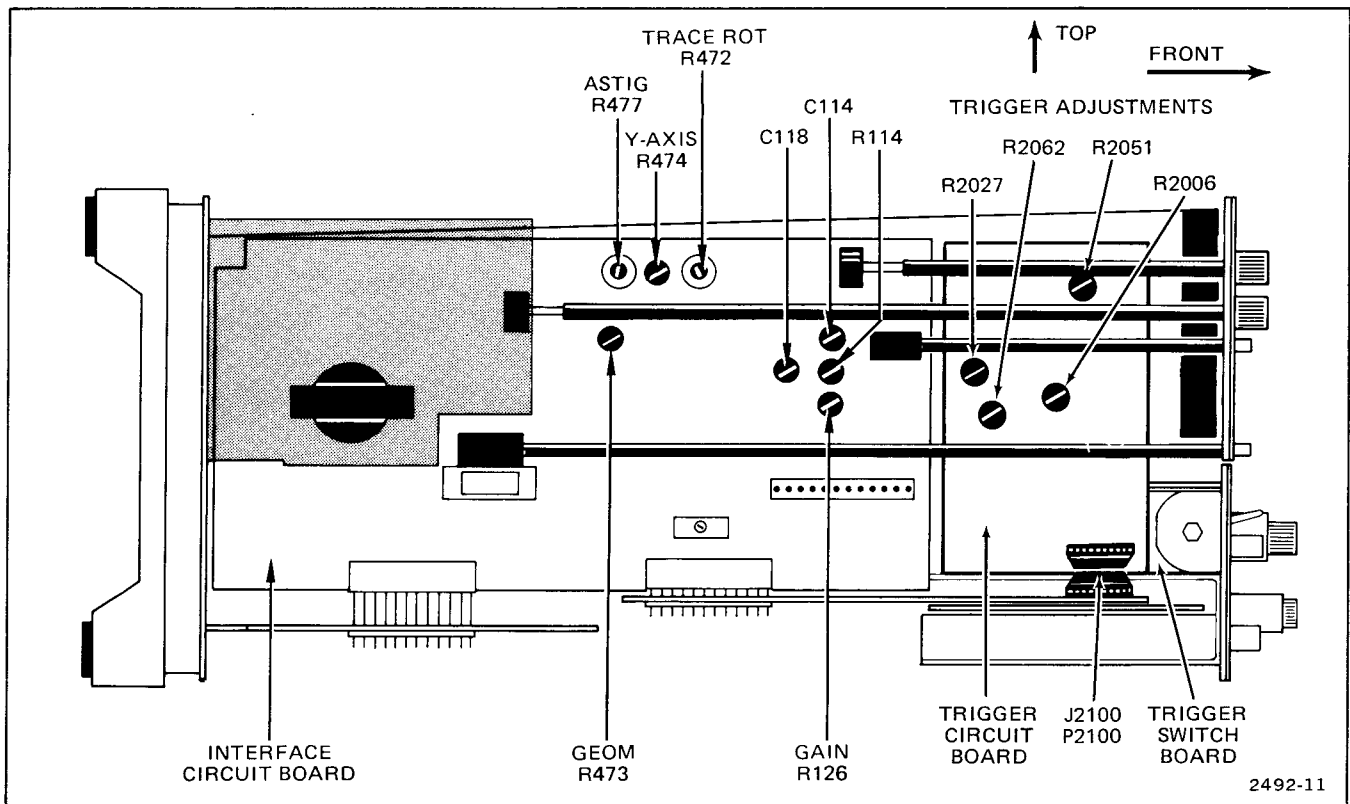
Trigger board adjustment locations (on left side of crt).
